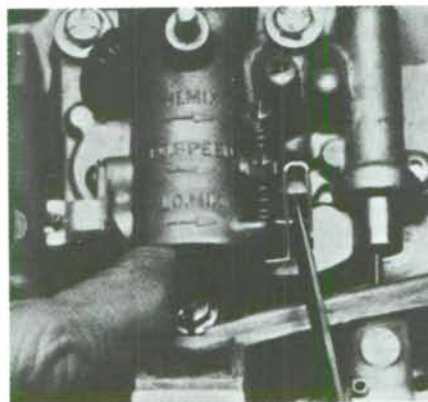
Keep finger on throttle butterfly as shown when adjusting carburetor. Refer to text for procedure.
